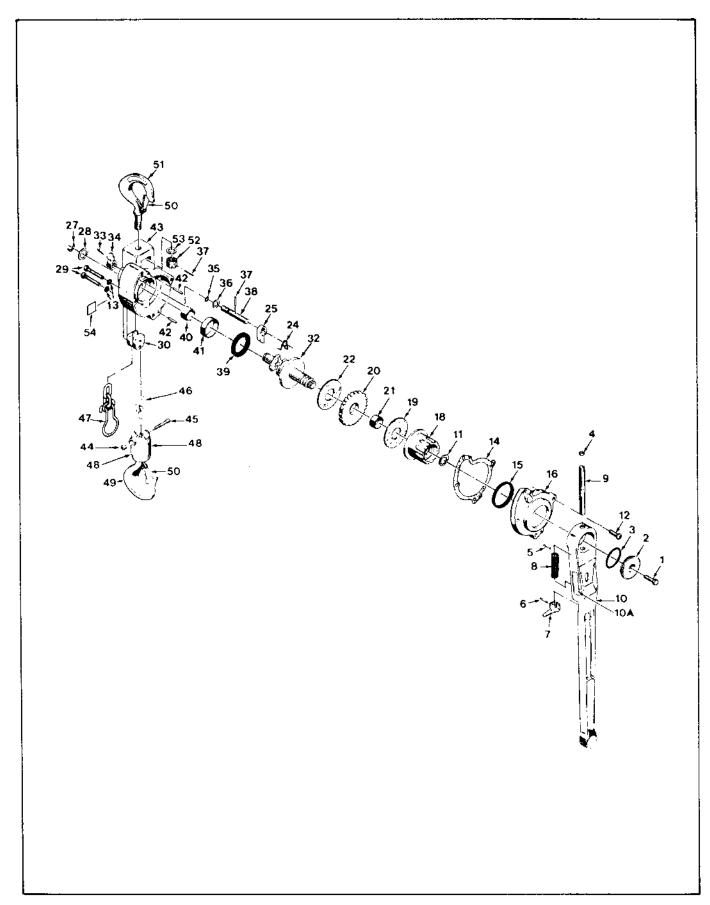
EXPLODED ILLUSTRATION OF MODEL MA-15 HOIST
